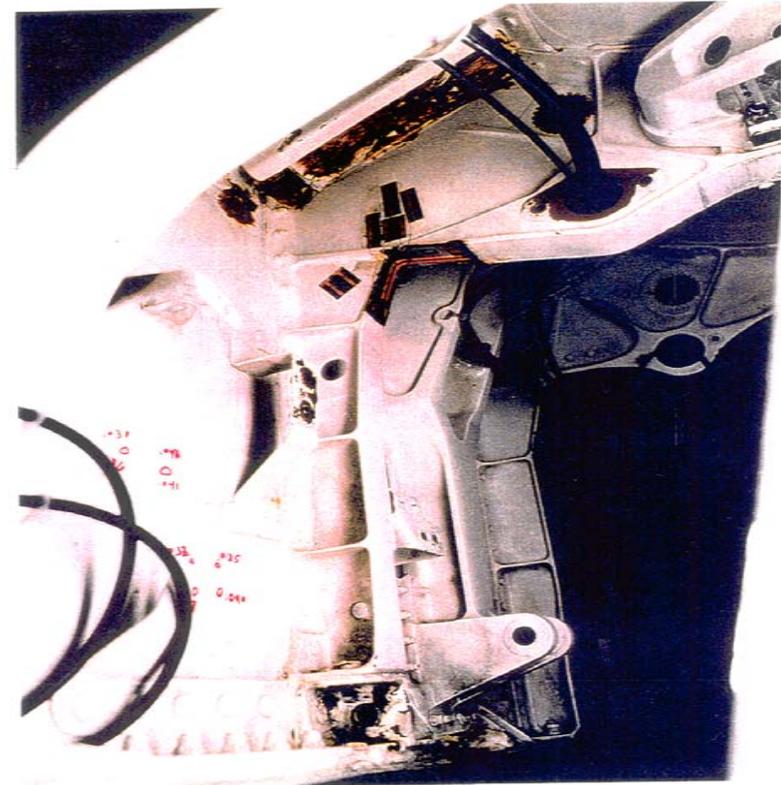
Photograph showing the location of the former segment flange radius on bulkhead 497 (L.H.S) and the ACPD probes installed on the location.
